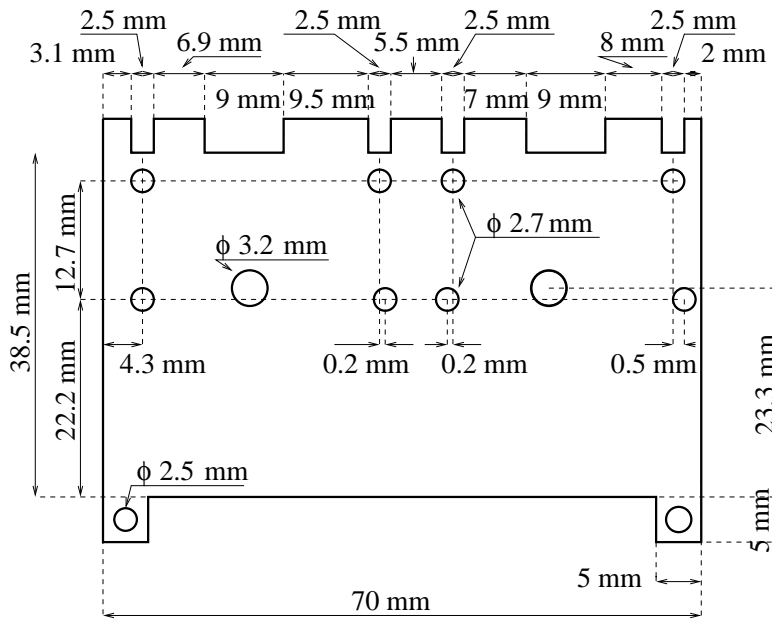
L shaped bracket design used in modules housing M16 type photomultiplier tubes. Brackets are made of 0.4 mm thick bronze plate covered by nickel.
